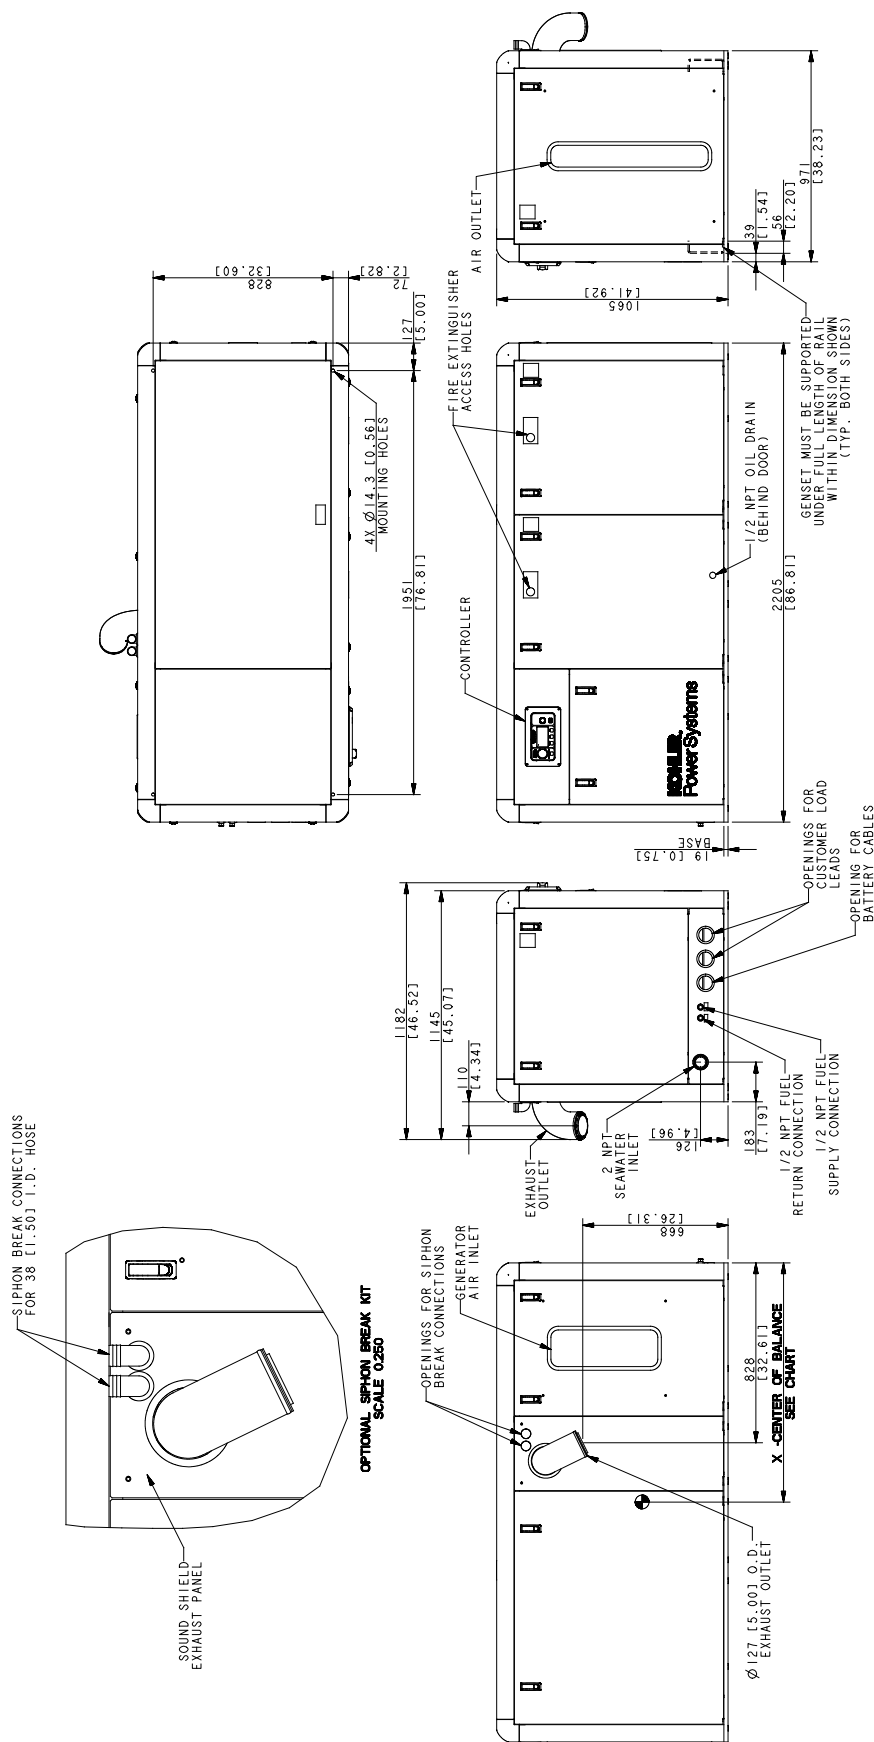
Dimension Drawing, 125/150EOZD(C)J & 100/125EFOZD(C)J (Open Unit Sheet 1 of 2)
